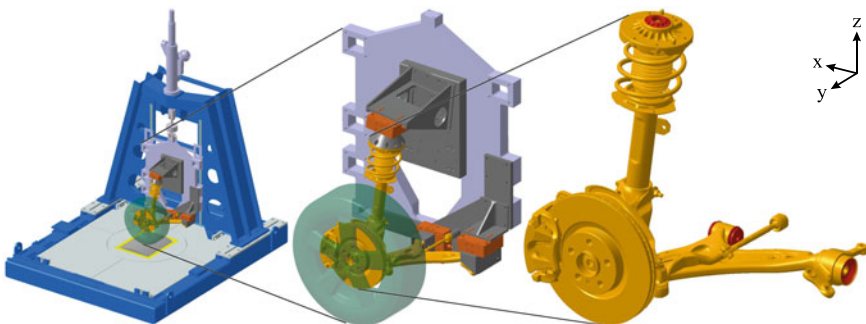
Drum-driven chassis corner test rig with MacPherson-type front axle setup including floating caliper disk brake system
